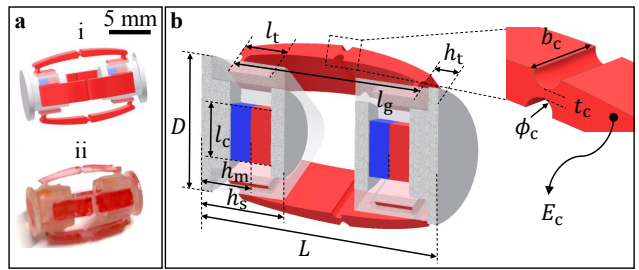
Design of the proposed soft magnetic anchoring robot module. a. CAD model (i) and photo (ii) of a representative prototype. The robot is composed of two inner magnets and an external four-legged Sarrus linkage. b. Half-section CAD view of the robot with labeled design parameters.
